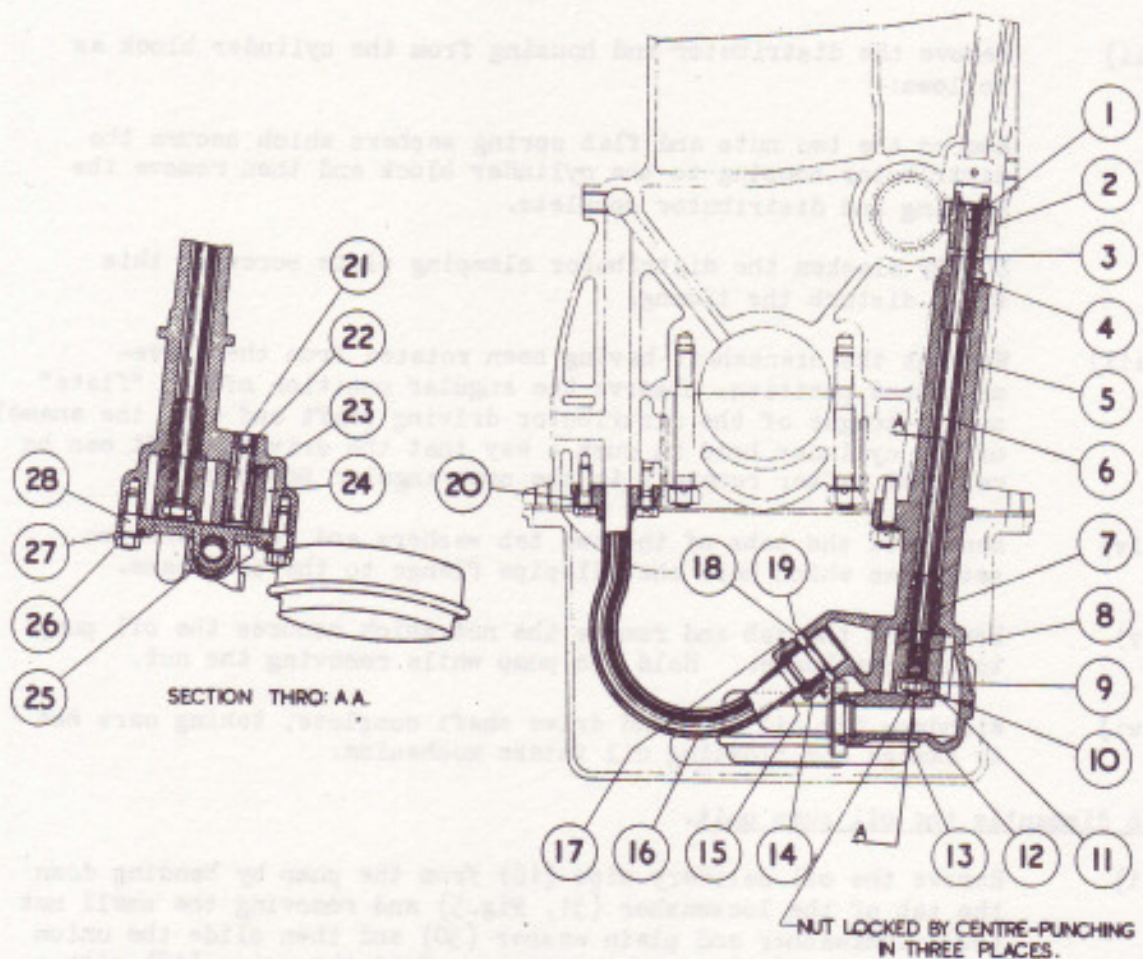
SECTION THROUGH OIL PUMP AND DRIVE
